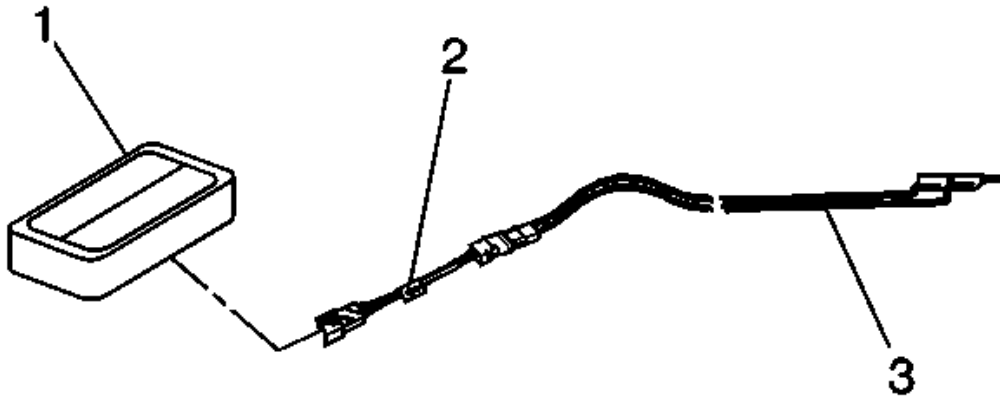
Inflator Module & SIR Deployment Harness Adapter
